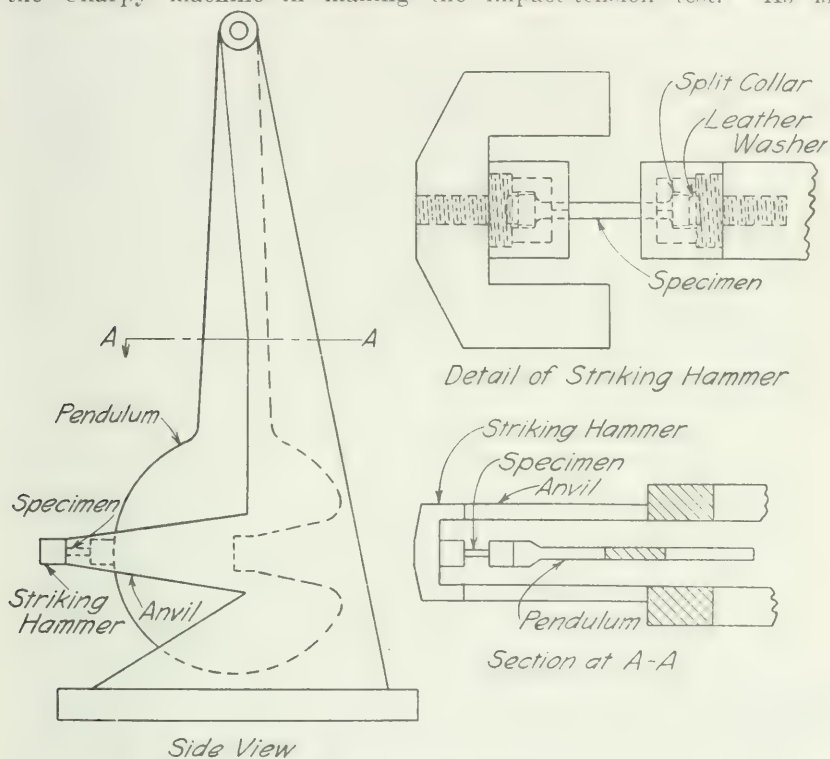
TENSION TEST ATTACHMENT FOR CHARPY IMPACT TESTING MACHINE
